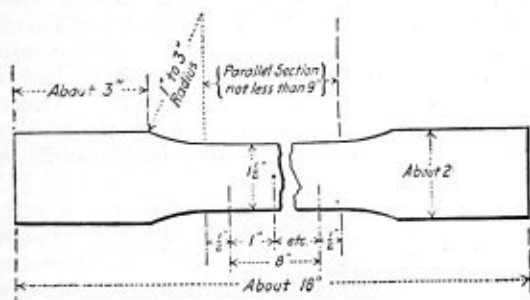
Standard form of test specimen required for all tension tests of steel plate of flange quality for forge welding
